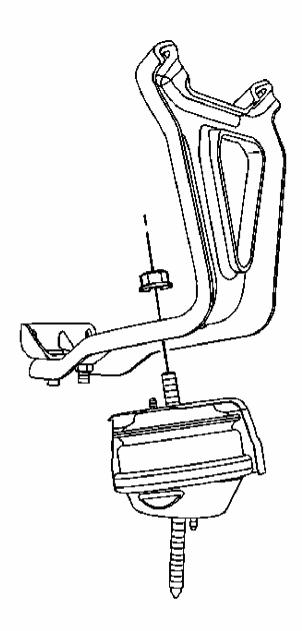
Identifying Front Engine Mount Courtesy of GENERAL MOTORS CORP.
